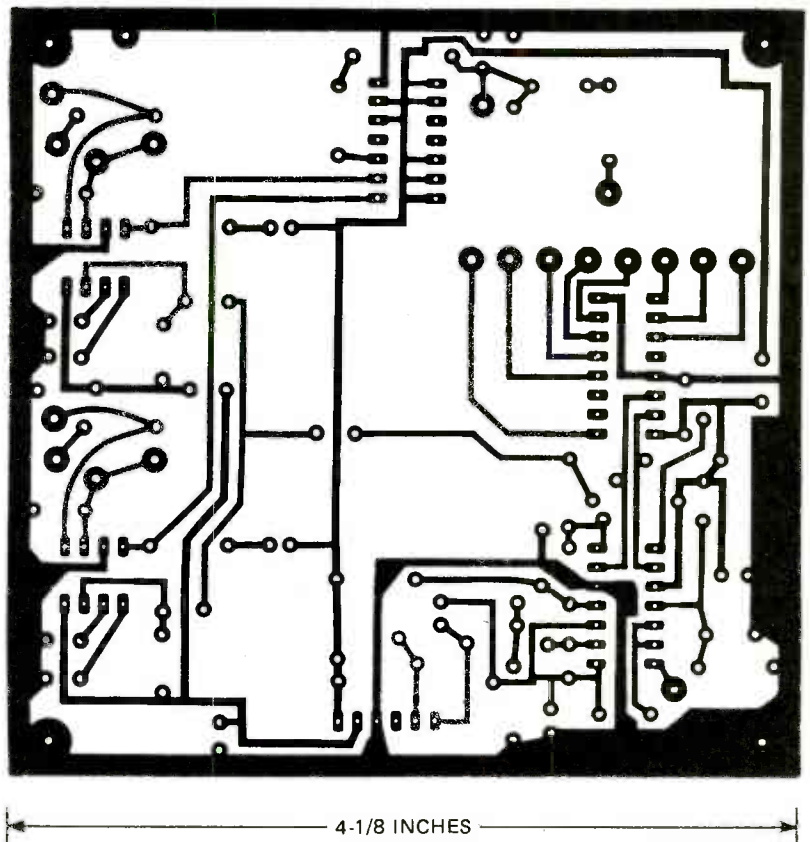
FOIL PATTERN for the single-sided decoder board is shown here full size.
